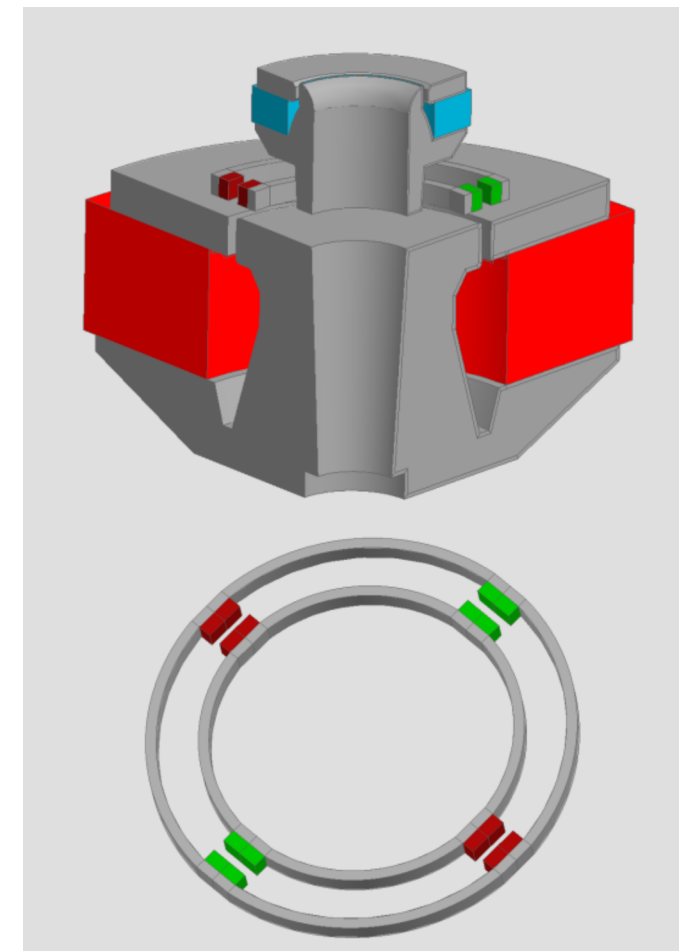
Primary (top) and sensor (bottom) motor systems within the LS LUXE Uni-Q driver array. Only the steel and magnet parts are shown for clarity.
